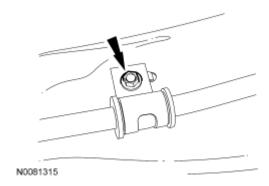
Power Steering Tube Bracket Bolt Courtesy of FORD MOTOR CO.
